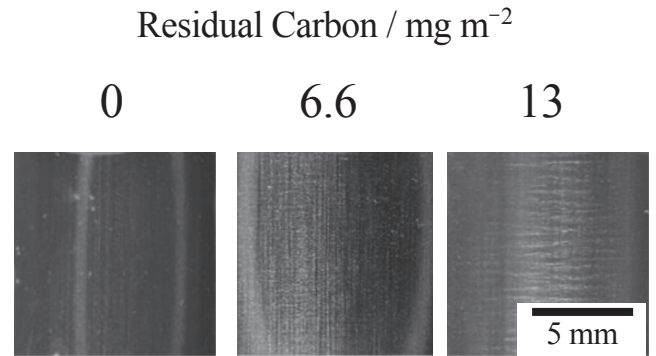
Specimen surfaces of copper tubes after immersion test.
